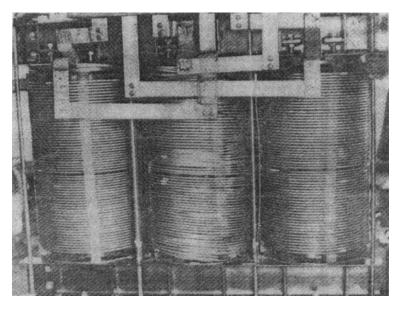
Photograph showing axial displacement of winding (middle limb)
